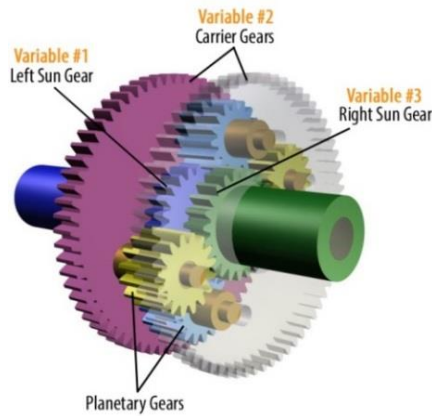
A perspective view of a basic symmetrical spur gear transgear with three variables. A transgear has three variables: namely left sun gear, right sun gear, and carrier gears. Two sets of planetary gears are shown here, but more sets can be added. Normally three sets of planetary gears are used to balance the system and to transfer more torque. When the carrier gears are not rotating (fixed), only one set can be used.
